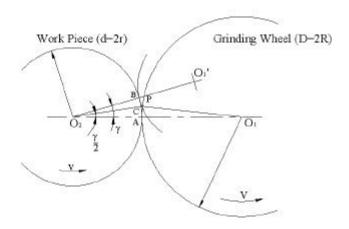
Ralative motion between grinding wheel and workpiece in cylindrical grinding
